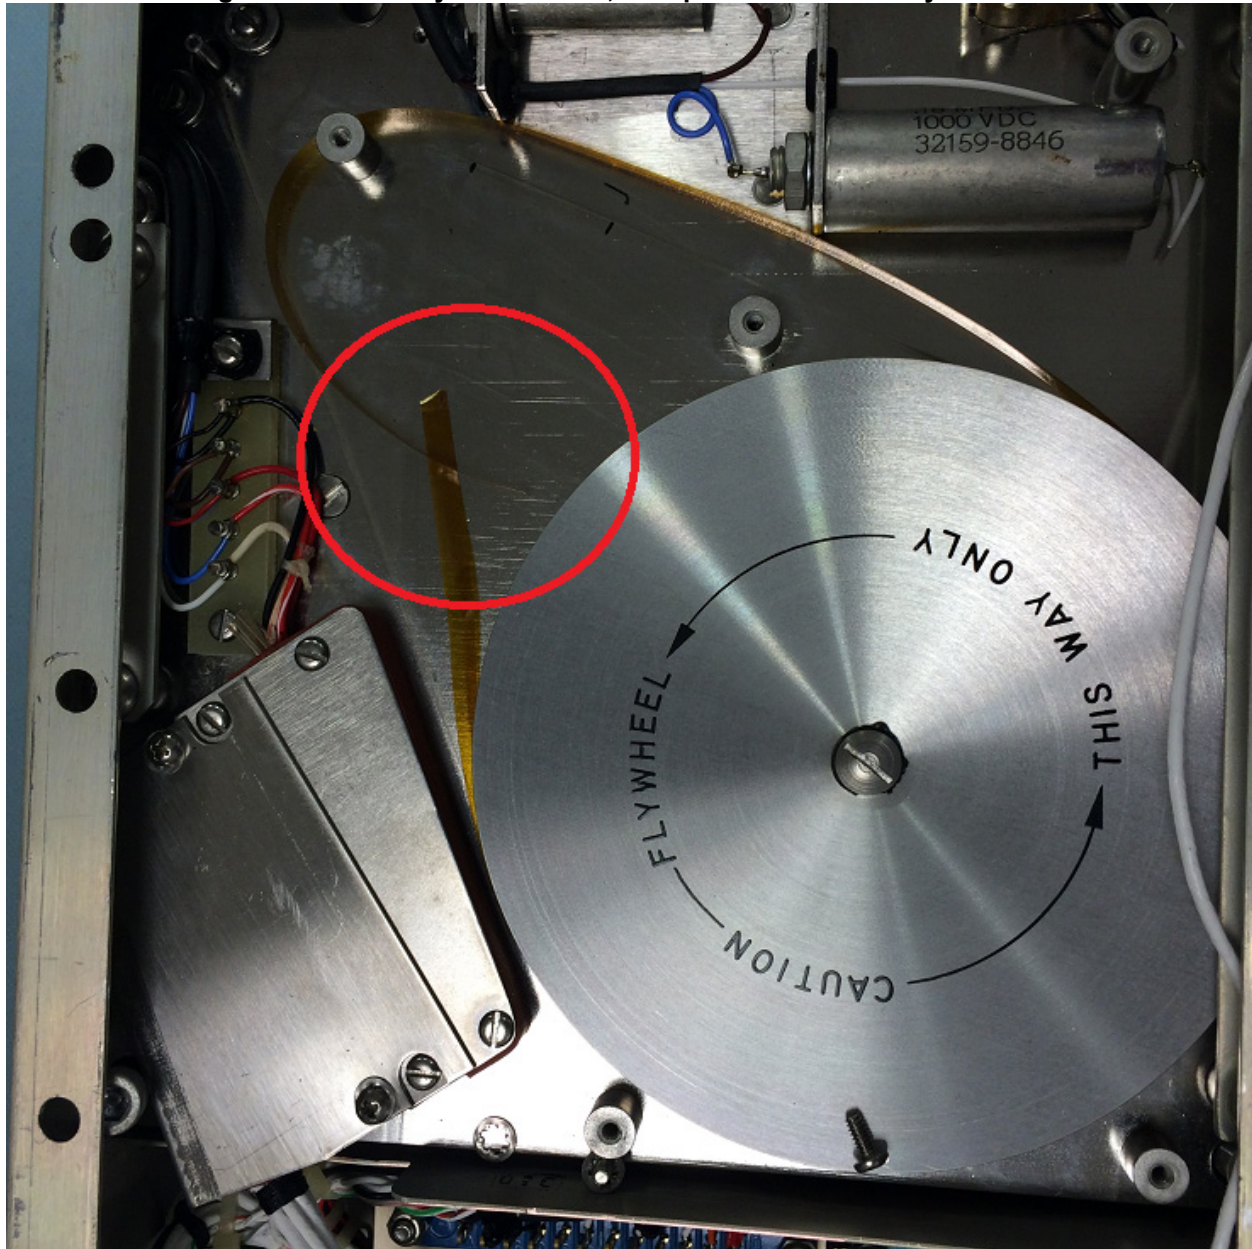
Broken Mylar drive belt, with protective assembly removed.
